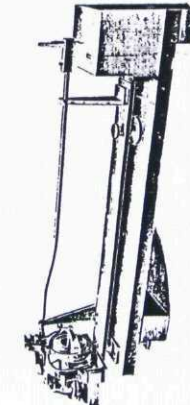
OBBY GEAR OF ADJUSTING SHAFT.
